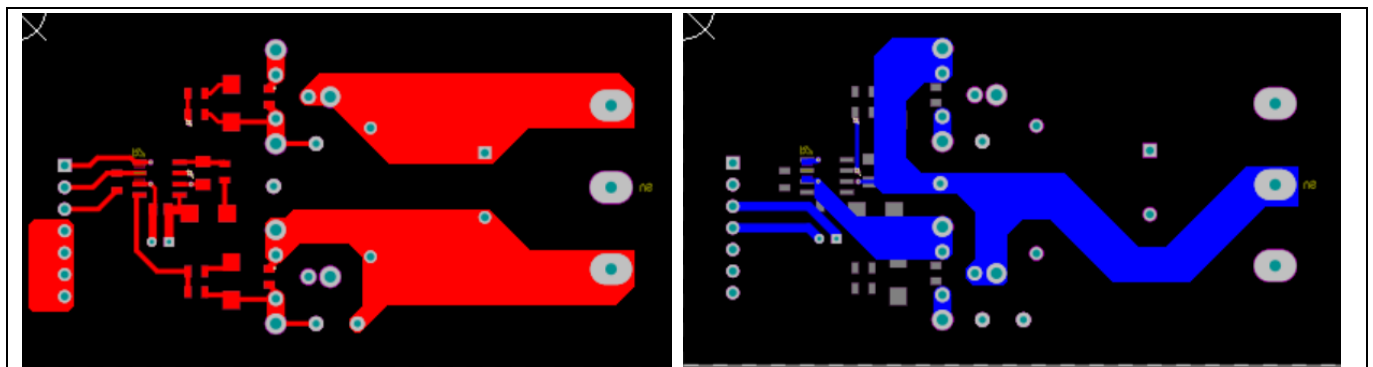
Top layer and bottom layer of 2ED21814S06F demo board
